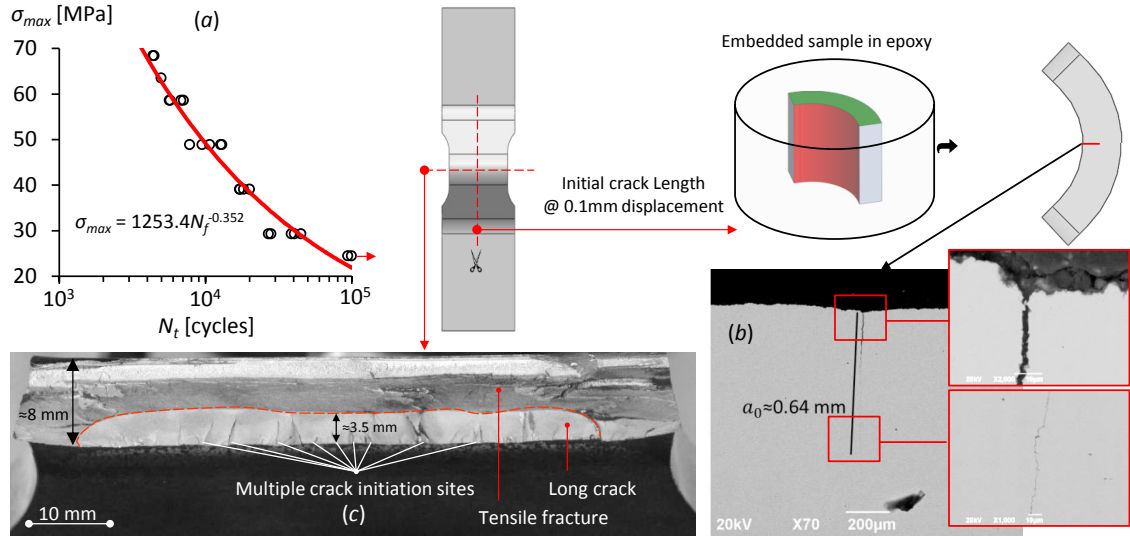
(a) typical  $S-N$  curve for bent specimen under LCF loading conditions; (b) measured crack length at 0.1mm displacement at  $F=40$  kN applied fatigue load; (c) fracture surface of failed fatigue sample at  $F=40$  kN.
